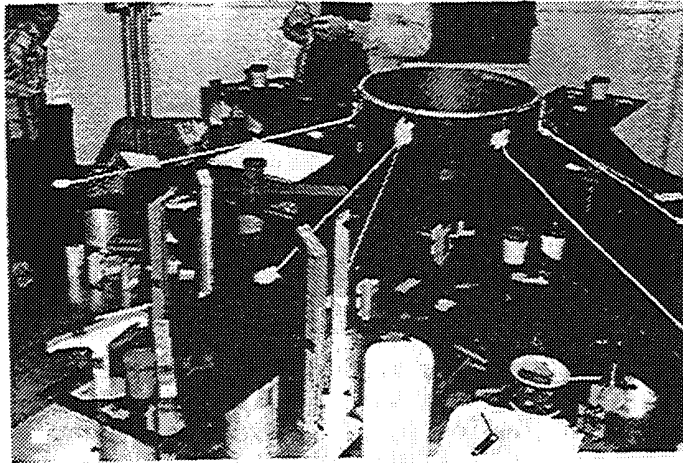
ASA assembly showing upper skin and aluminum fixturing
